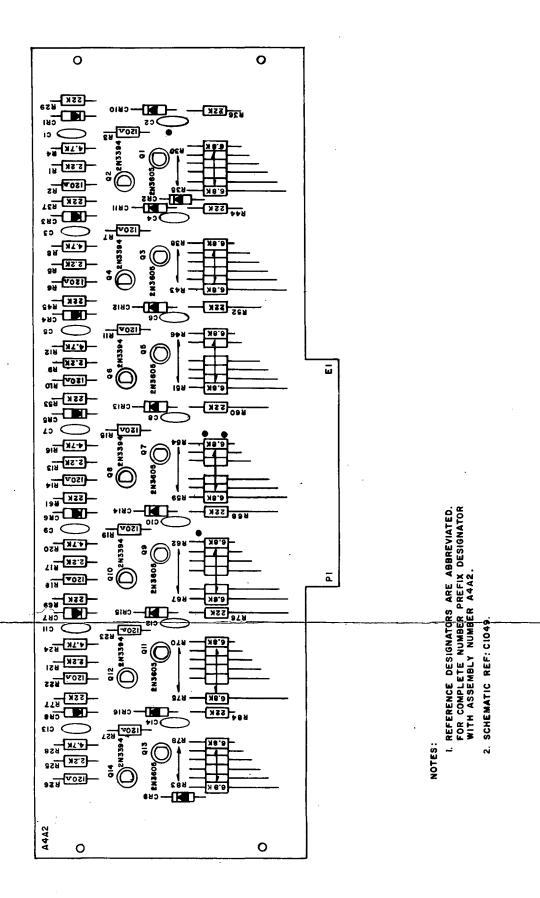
4- and 5-Stage Ring Counters Assembly Diagram
